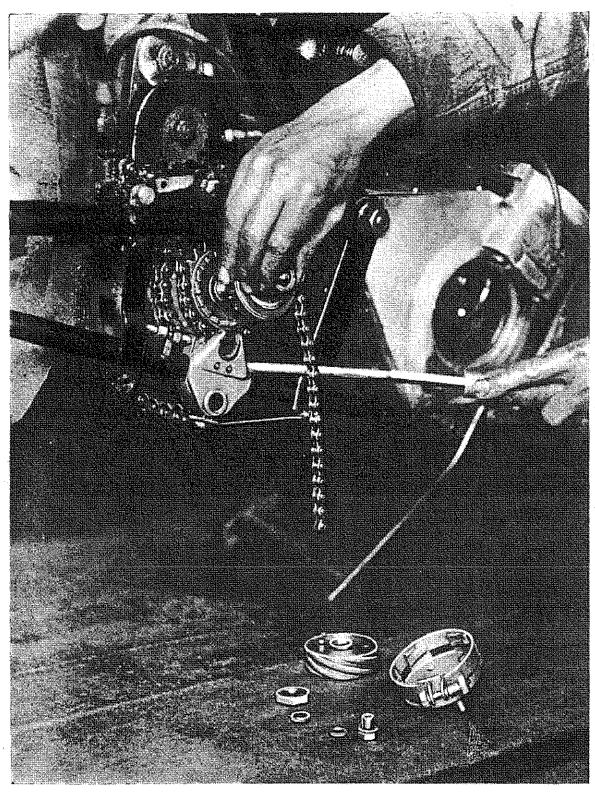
Snowing Removal of Kick-starter Device. Lifting gear with screwdriver and sliding off device.
